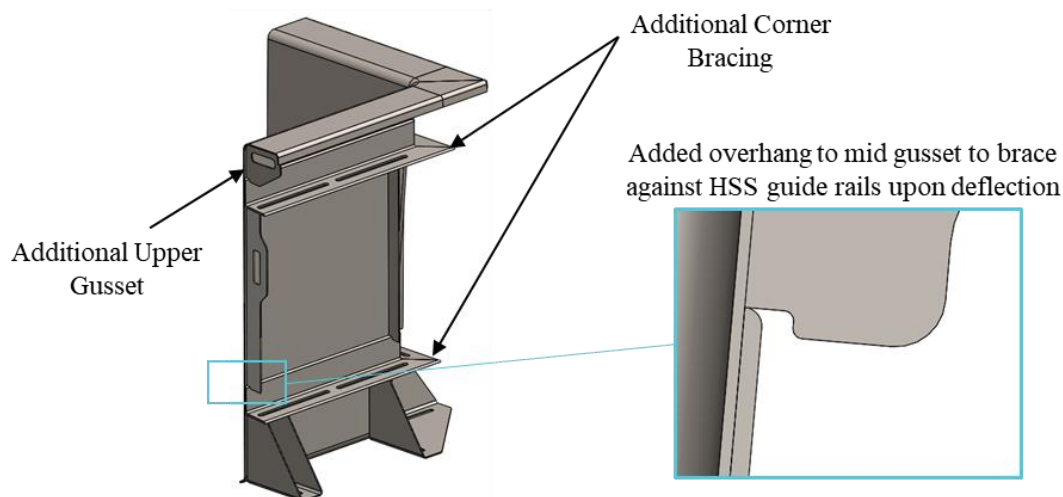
Deflection study adjusted corner weld assembly geometry
